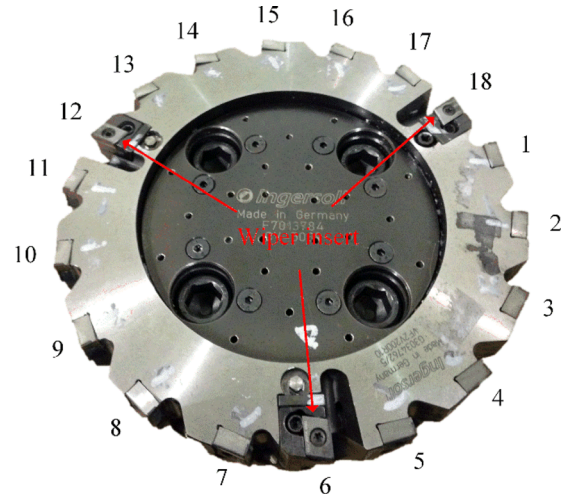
The face milling cutter with 15 cutting inserts and 3 wiper inserts
